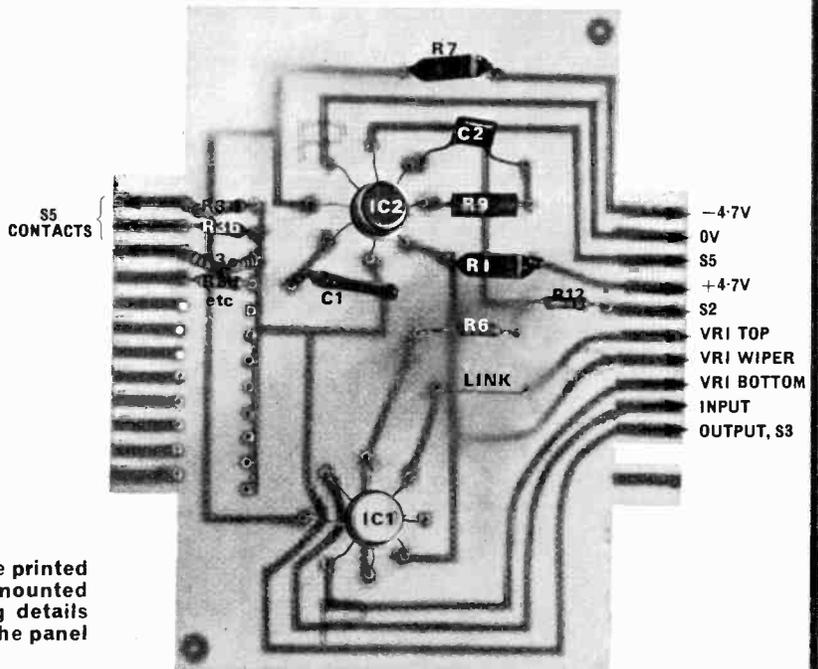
(right). A photograph of the printed circuit board with components mounted and annotated, and with wiring details from the two edge connectors to the panel and case-mounted components
